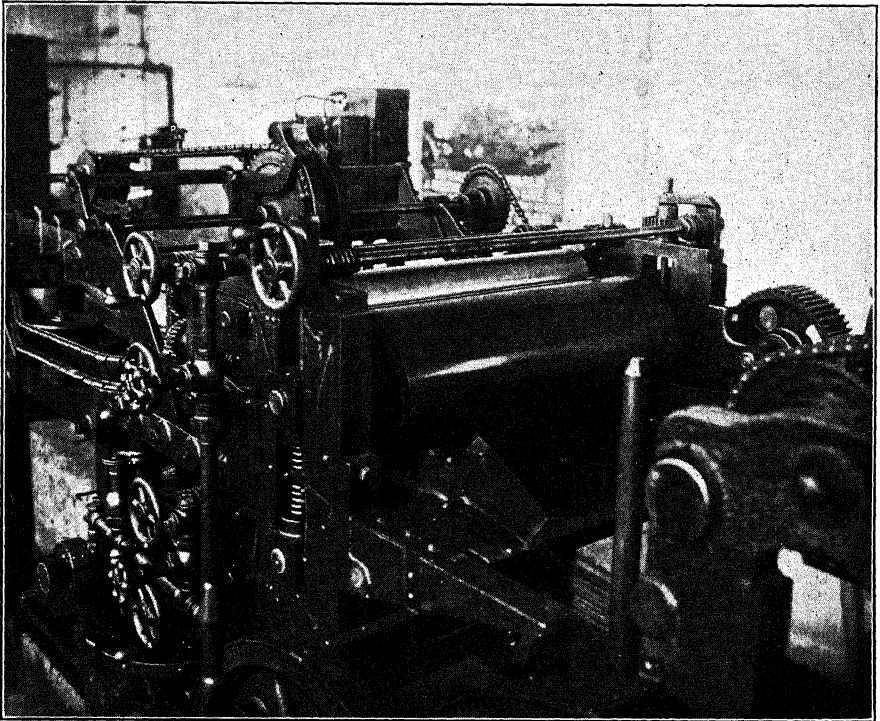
COATING ROLLS SHOWING PARALLEL ADJUSTING GEARS.
